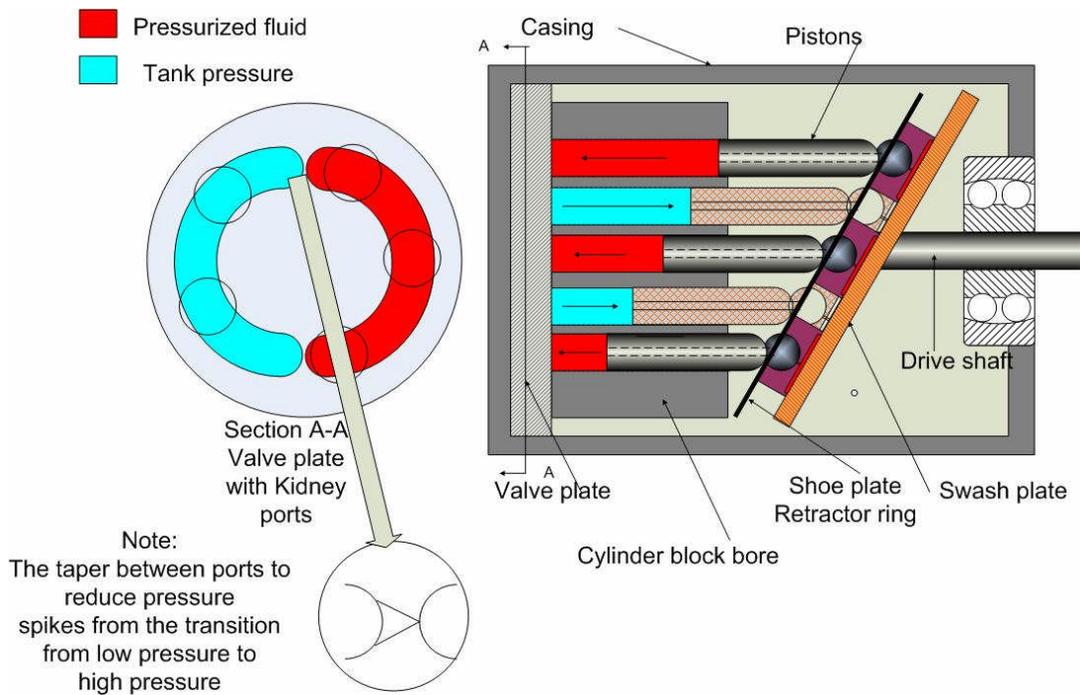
(b) Axial in-line piston pump (Schematic but not exactly the same as shown in part(a))
